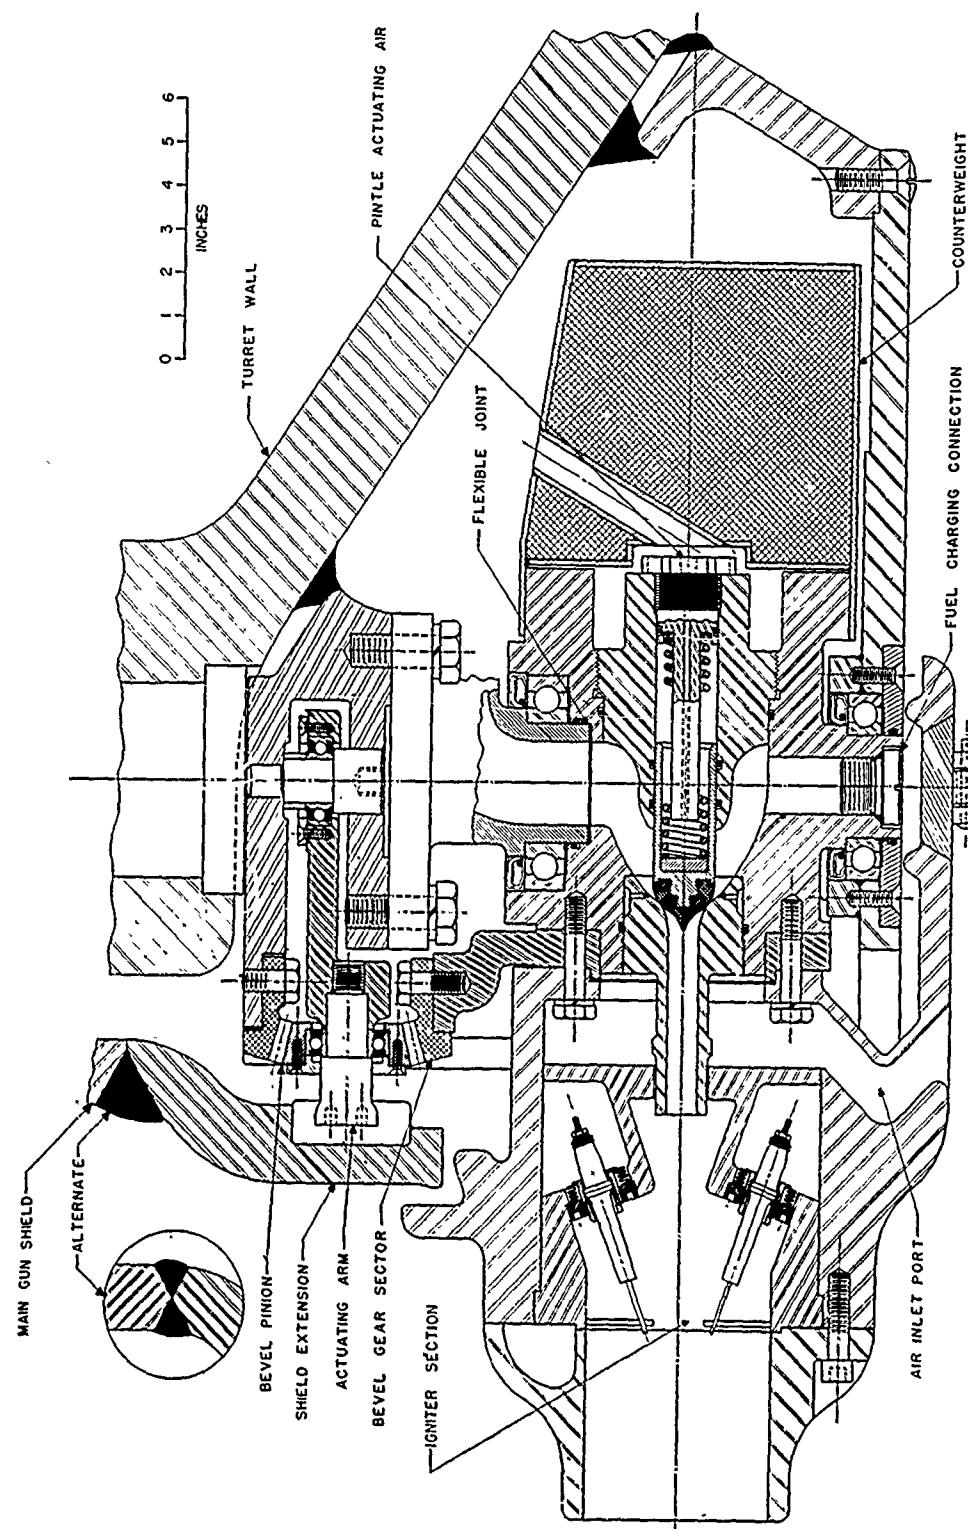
Cutaway of E19 gun, flexible joint, and mount.
